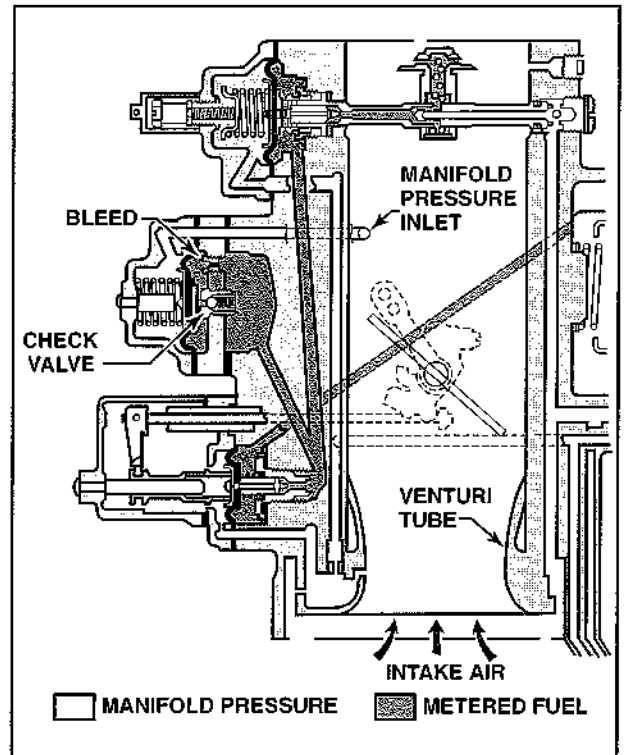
A typical accelerator pump on a pressure injection carburetor consists of a single diaphragm pump with an air chamber that is vented to manifold pressure and two fuel chambers separated by a bleed valve.
